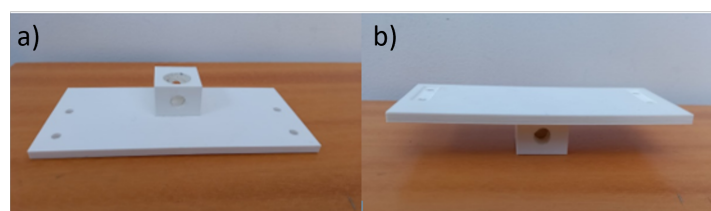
Printed final filament support piece: a) inclined top view; b) inclined front view.
